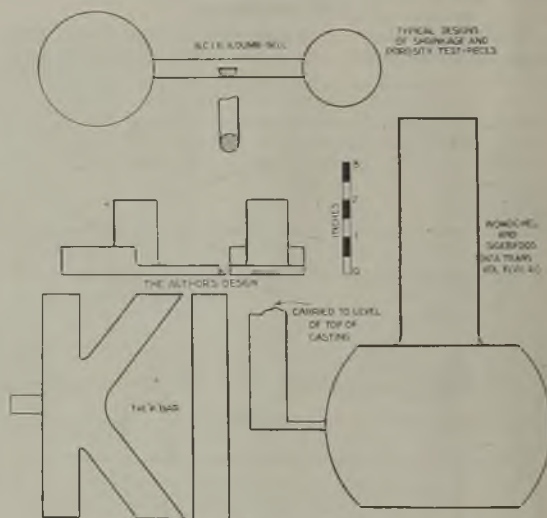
FOUR TYPES OF TEST-PIECES.
